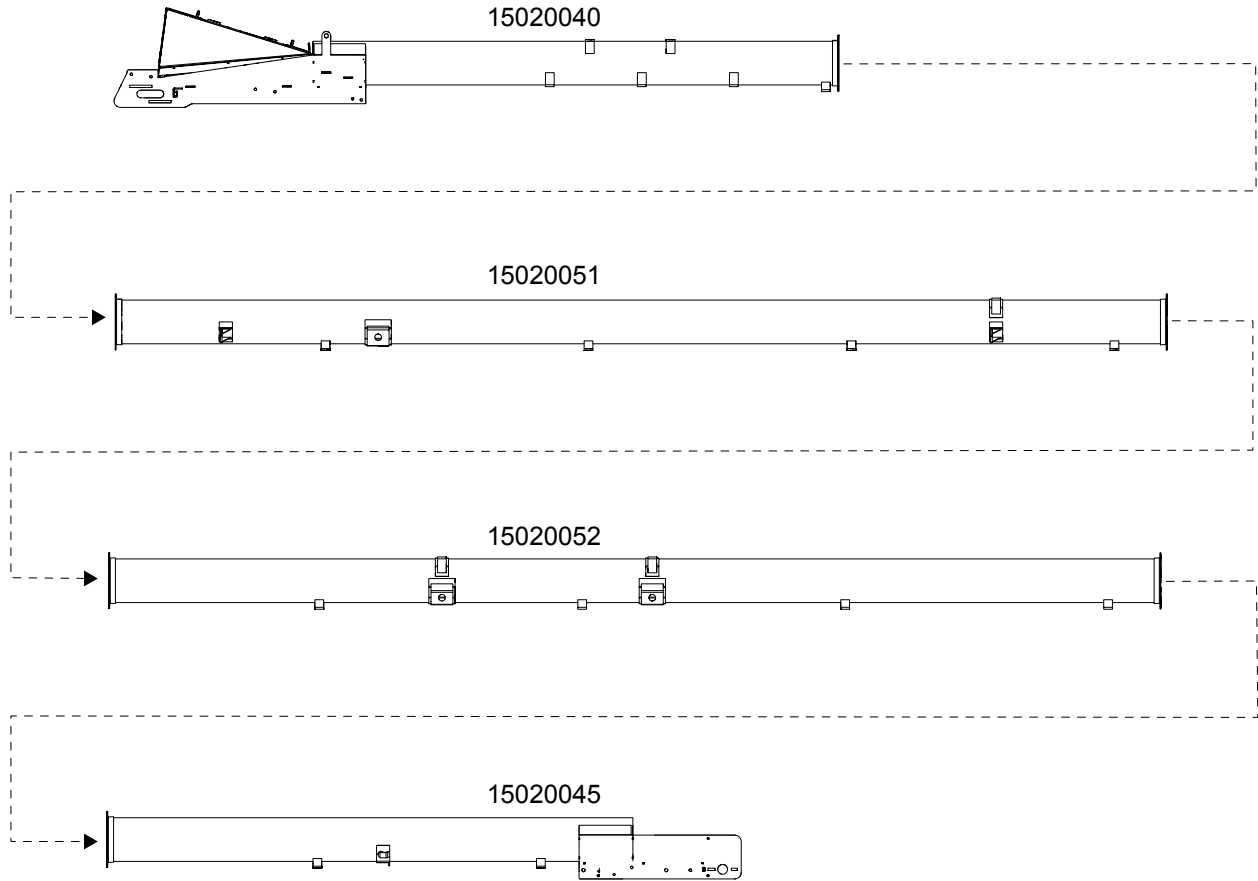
Conveyor Tube Layout for 1565 Model (Hutchinson)
